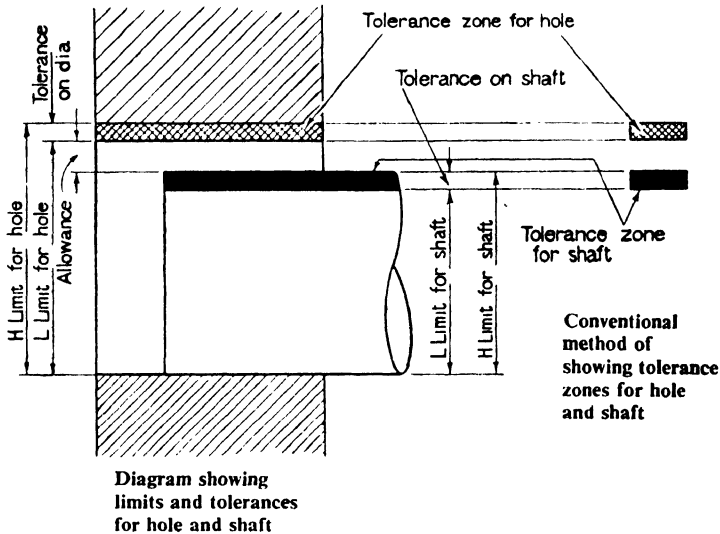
B.S. CONVENTIONAL METHOD OF SHOWING TOLERANCE ZONES FOR HOLE AND SHAFT
